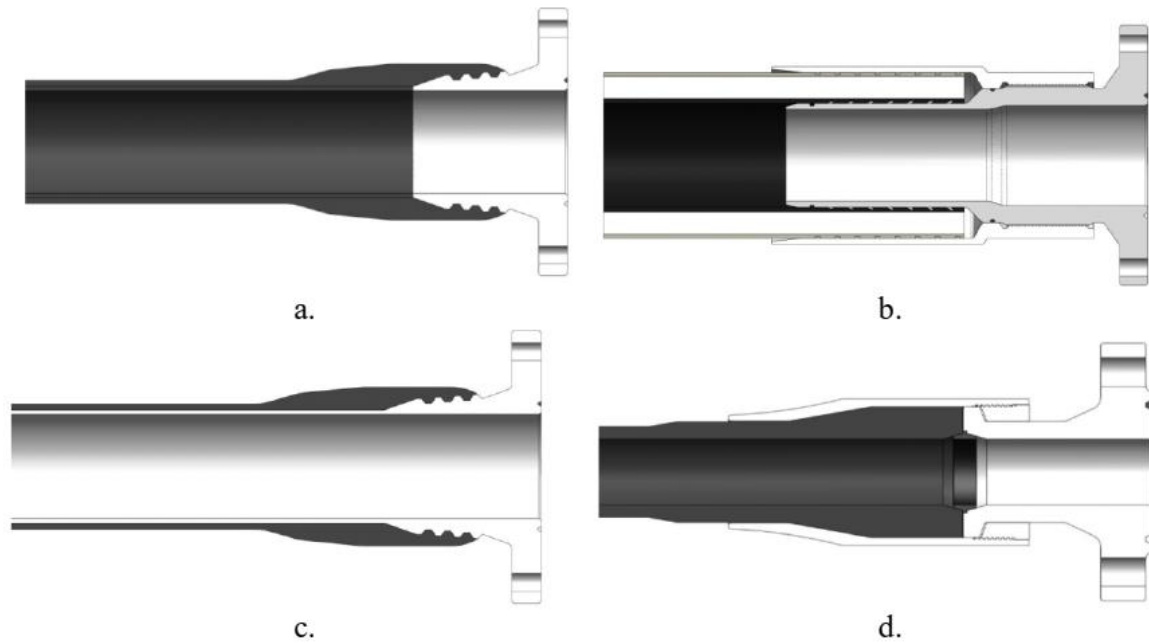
Different end fitting designs presented including trap lock end fitting fitting (a), swaged end fitting (b), metallic liner end fitting (c) and Magma end fitting (d) [16]
